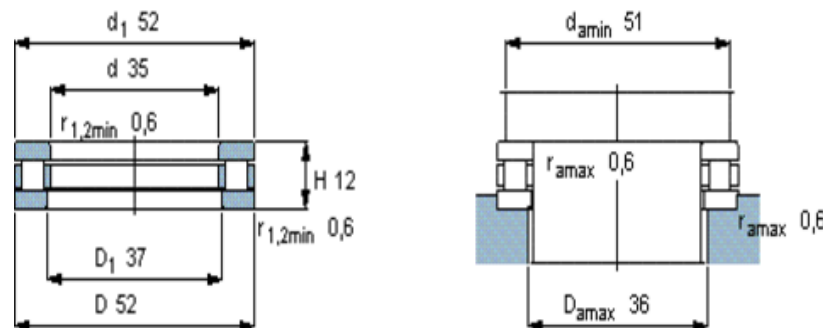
Cylindrical roller thrust bearing (RTB) 81107 TN geometry [SKF, 2013].
